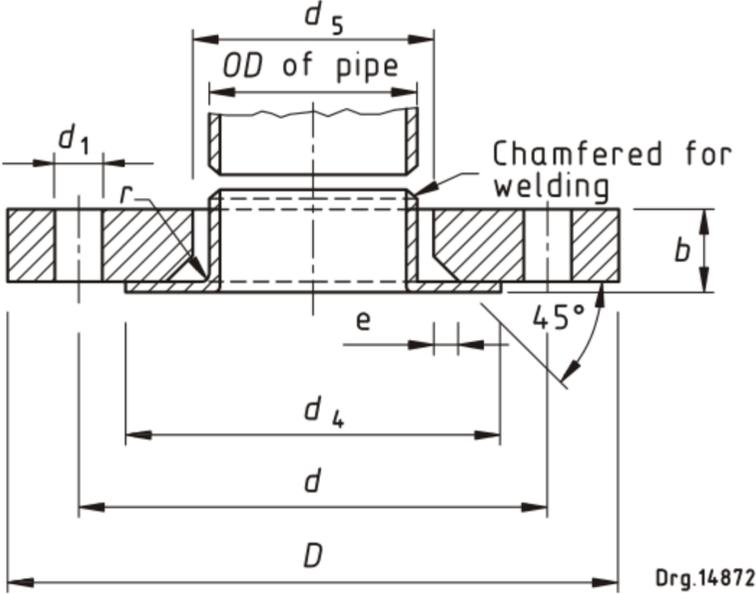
(f) — Type 6: Steel loose flange for welded-on lapped pipe ends
